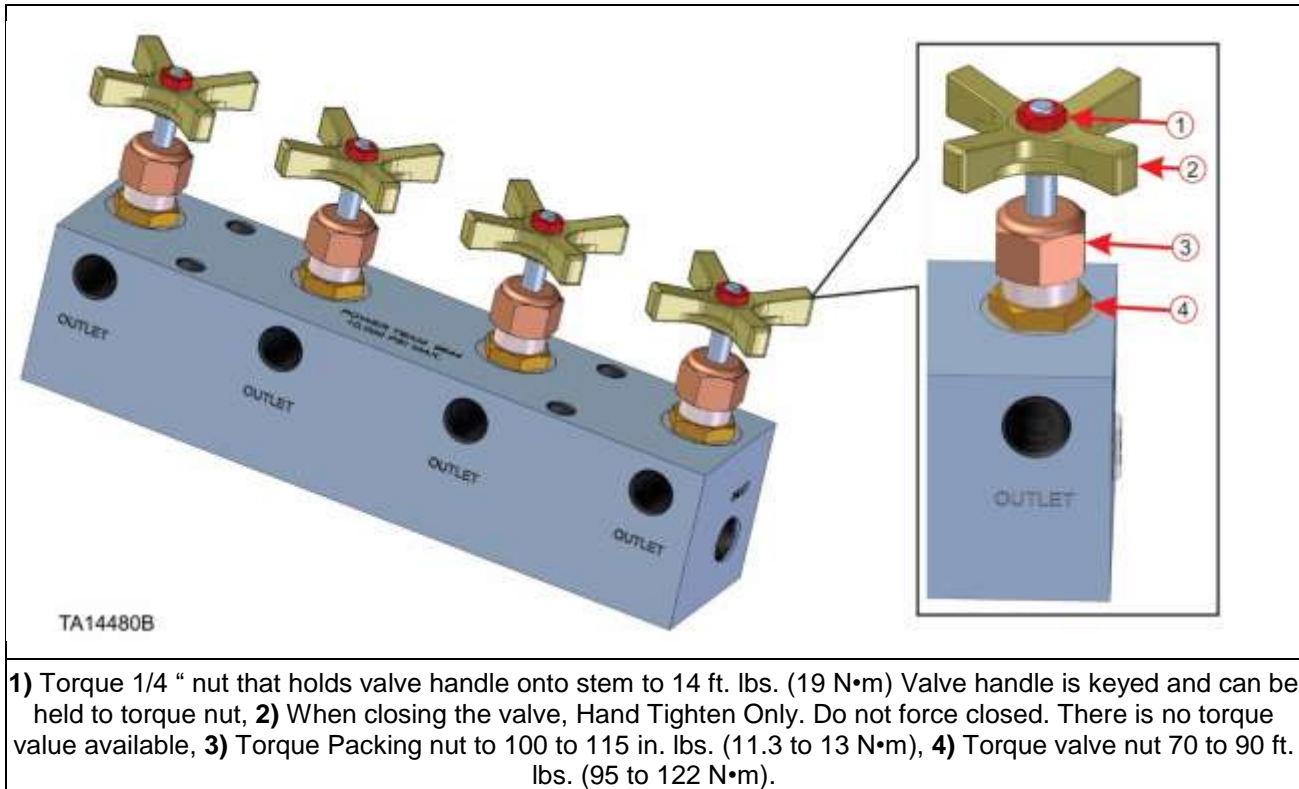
Manual bleed valve assembly (hoist/bucket cylinder bleed down) nut torque values
